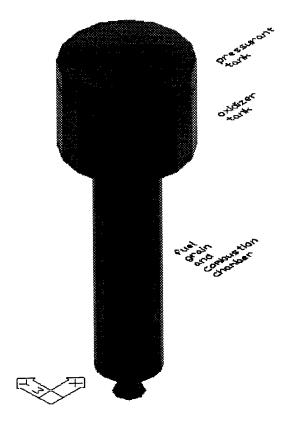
AutoCAD Drawing of WASP Hybrid Rocket
